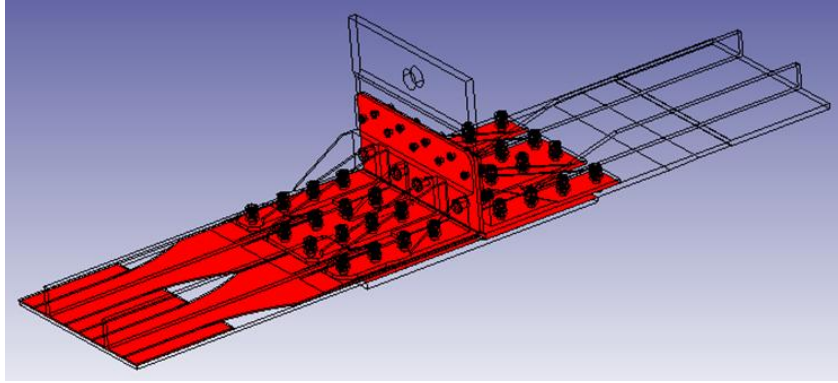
Interfaces extracted from a CAD assembly model. Components are represented with a wireframe setting whereas geometric interfaces are depicted in red.
